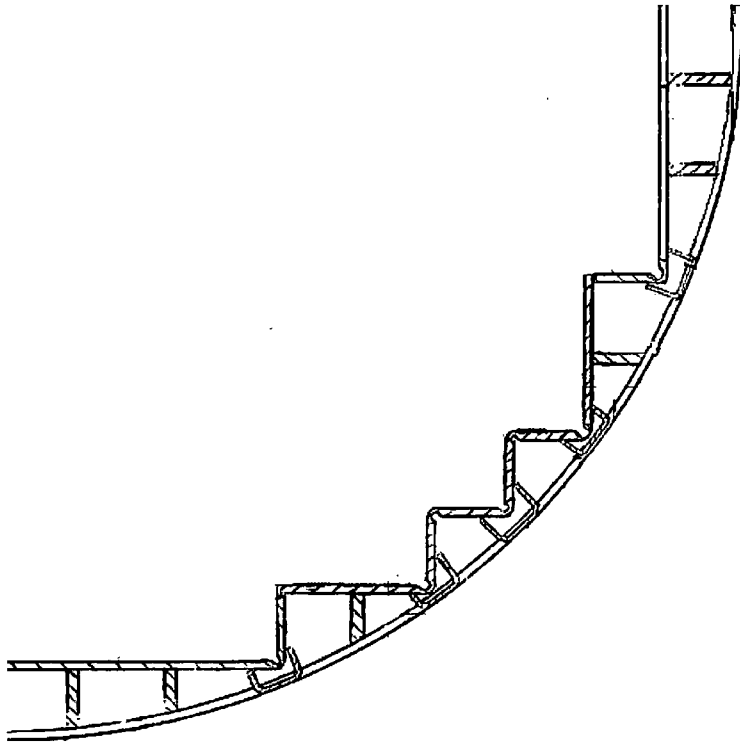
Palo Verde Units 1, 2, and 3 Core Shroud Cross-Sectional View
